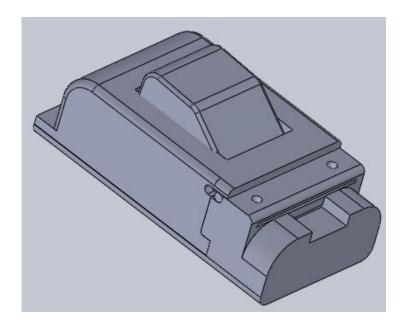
Solid works Drawing of Mechanism for Volture Piezoelectric Energy Harvester
